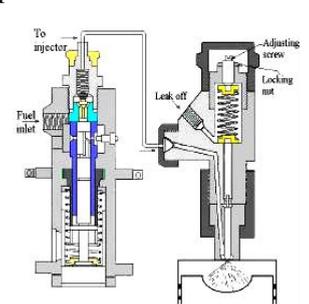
Experimental set up Fig. Bosch fuel pump and fuel Injector
